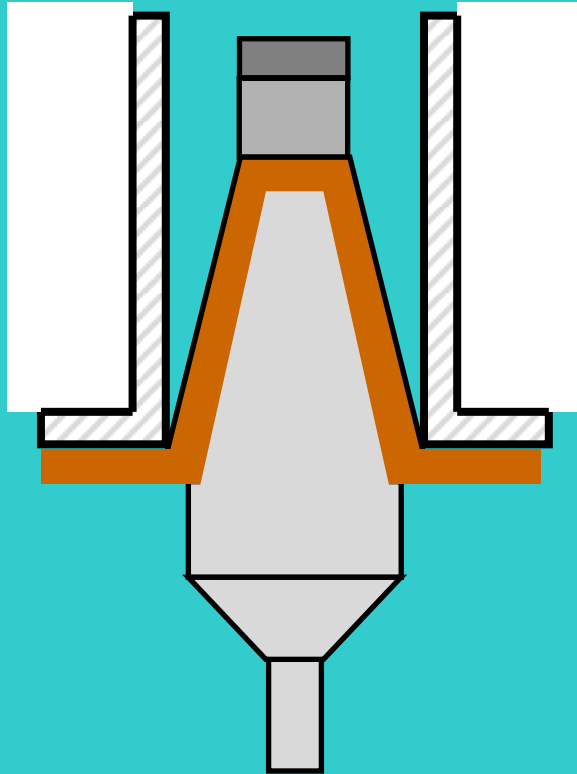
Dry-type cable connection assembly – Typical arrangement
